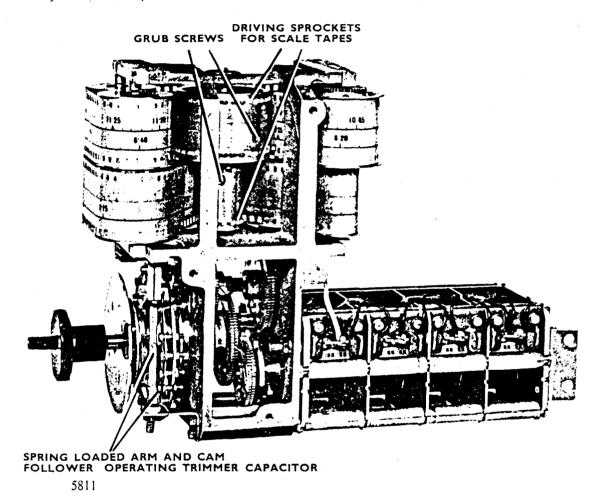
TUNING CAPACITOR AND SCALE DRIVE ASSEMBLY. RIGHT HAND SIDE
